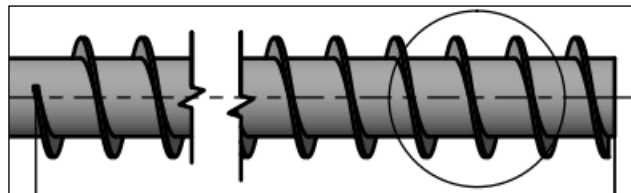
Spiral profile which welded outside the suction pipe
